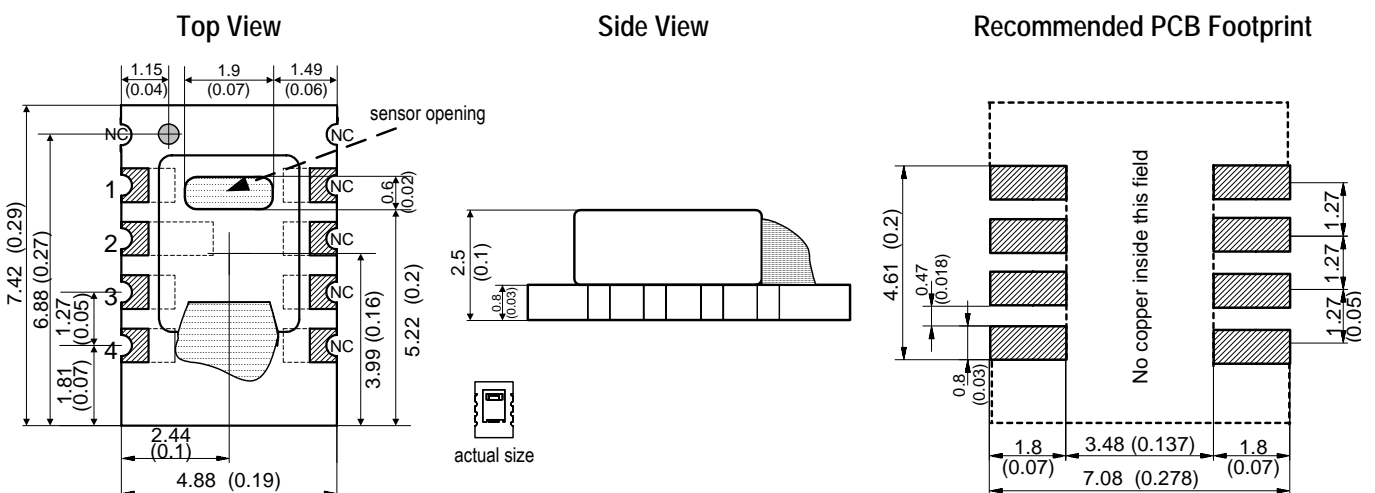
SHT1x drawing and footprint dimensions in mm (inch)
